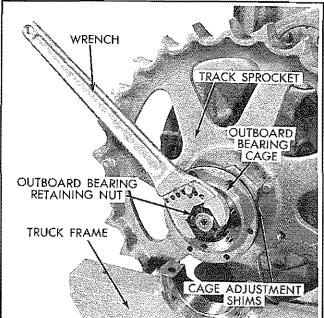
Removing Final Drive Outboard Bearing Retaining Nut
